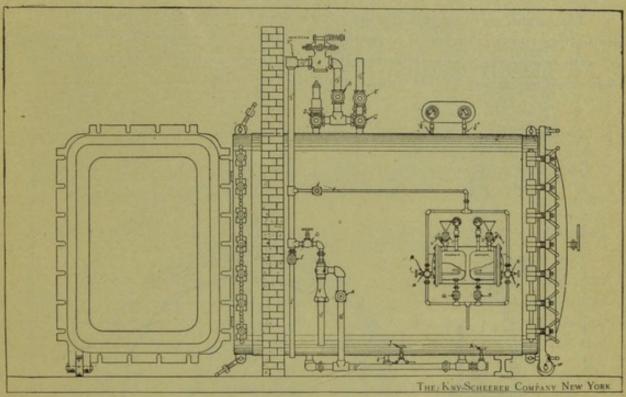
Fig. A-Rectangular Form American Steam Disinfecting Chamber, Jacketed Type with Toggle Bolt Door, as Manufactured by THE KNY-SCHEERER CO., New York
